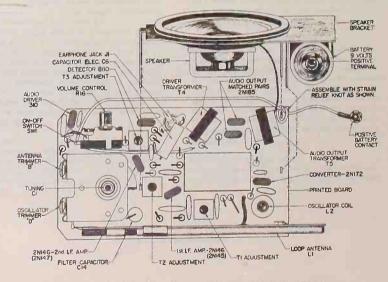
Top View Parts Layout with Speaker Raised from Board
